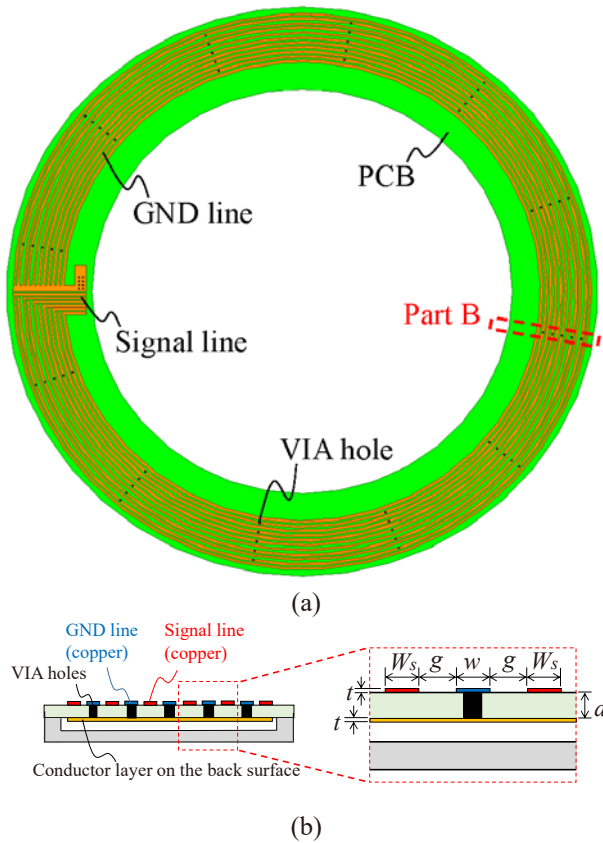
Proposed rotary transformer (a)Top view, (b) Outline of the cross section at Part B.
